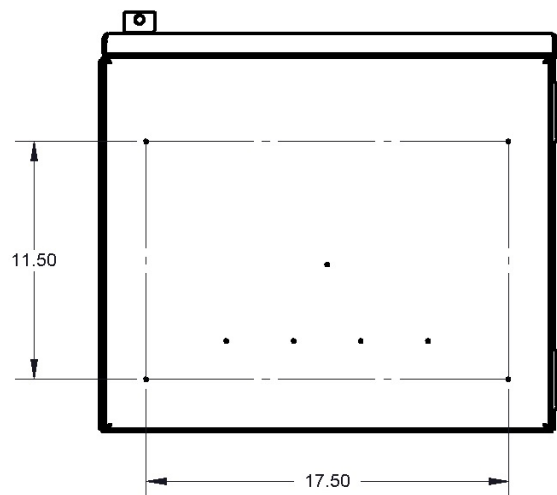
Enclosure/Plinth Mounting Hole Locations
